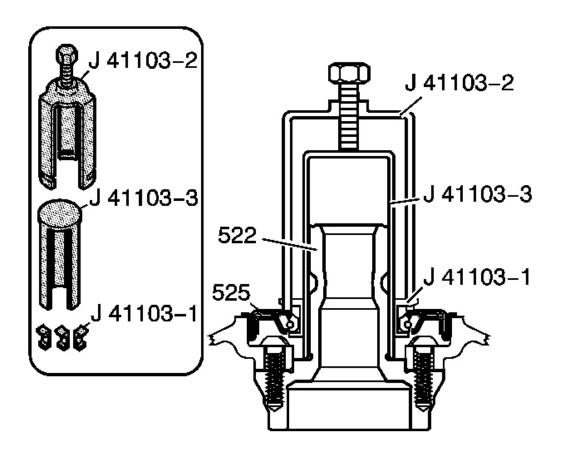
Cross Sectional View Of J 41103 Components Courtesy of GENERAL MOTORS CORP.
